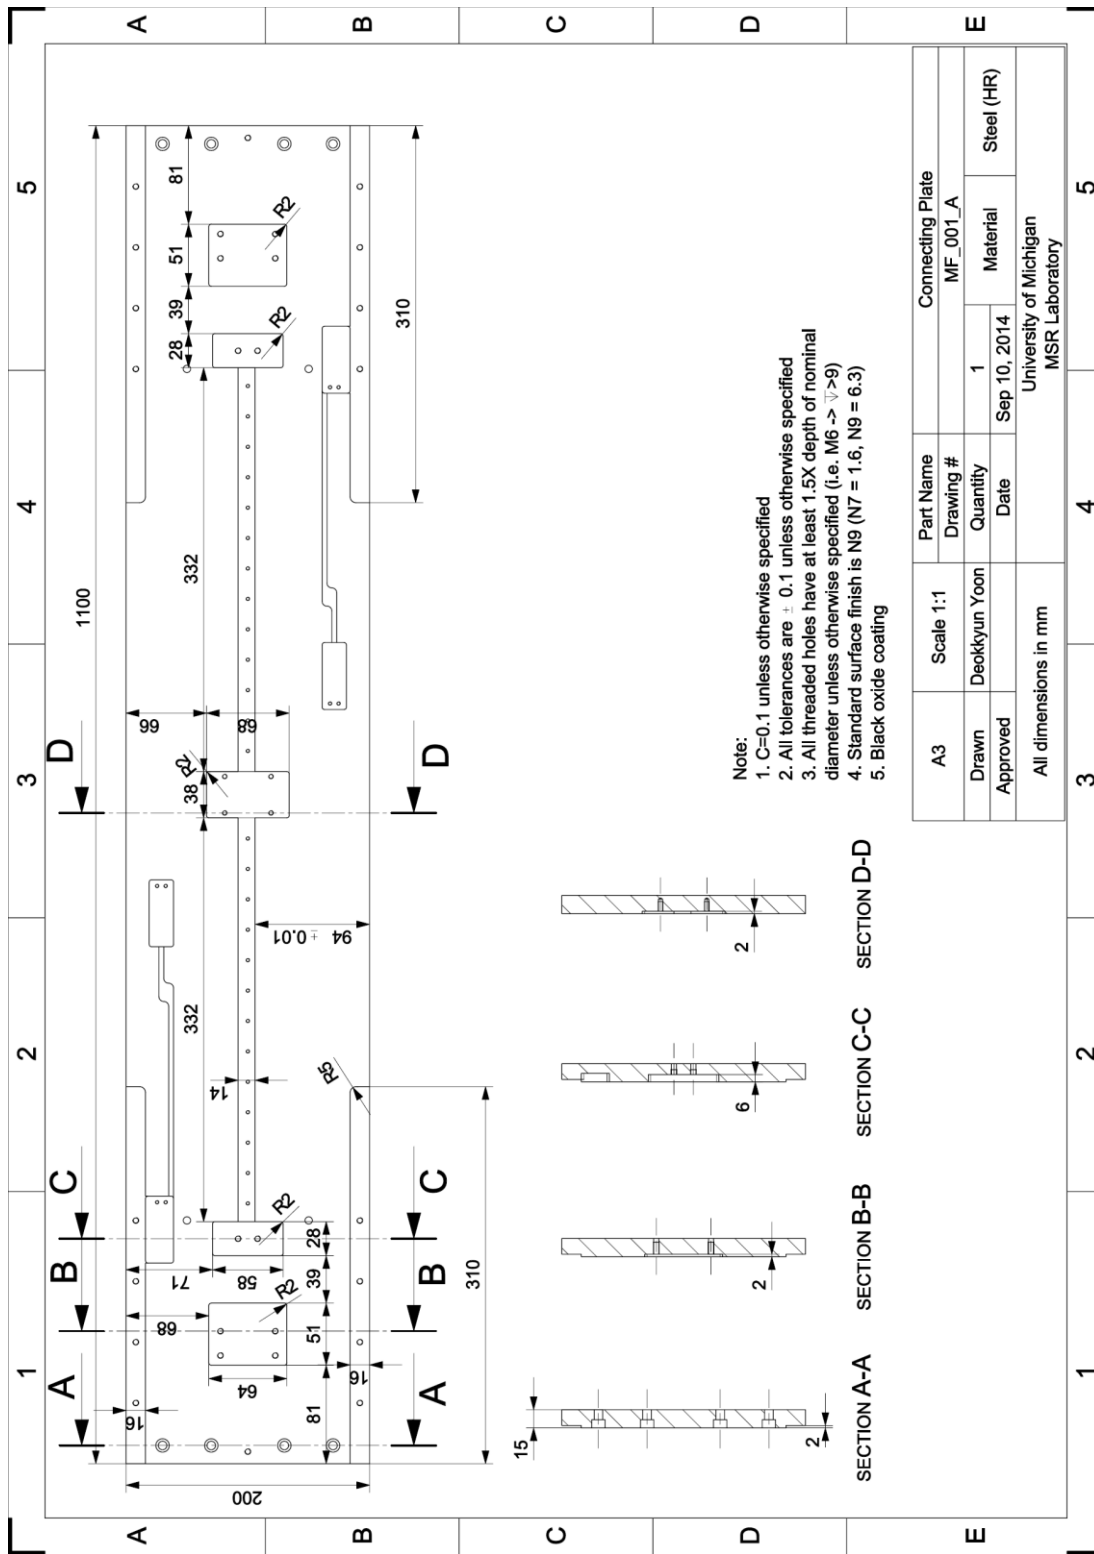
Manufacturing drawing of Connecting Plate (pg. 1 of 3).
